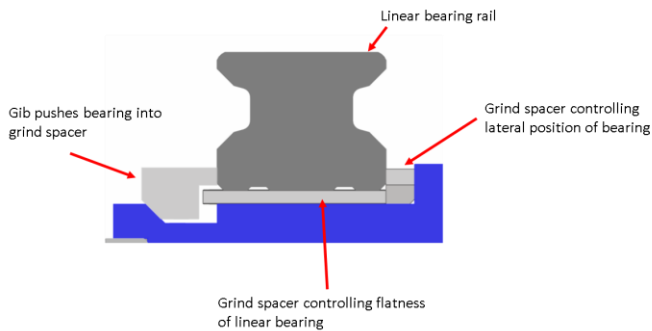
Example of a linear bearing-grind spacer arrangement designed with post-build adjustments in mind. By removing the gib, and potentially a single bolt in the linear bearing, an individual grind spacer controlling flatness may be removed without removal of the entire linear bearing..
